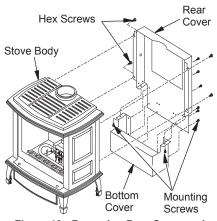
Removing Rear Cover and Bottom Cover from Stove Body
